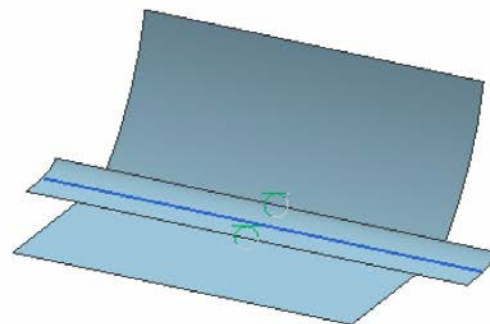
Preview of the fillet with the *Extend Blend* check box selected
